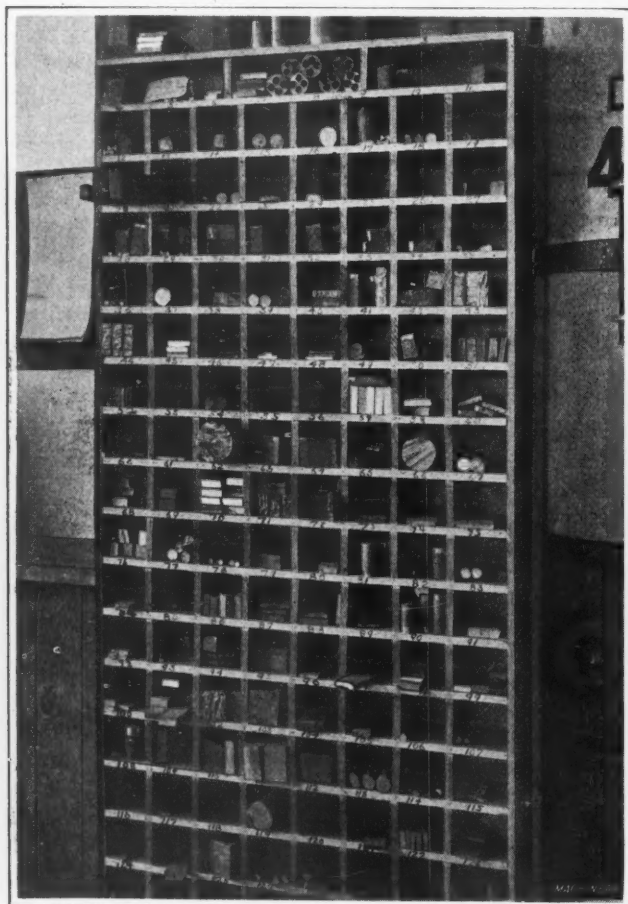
Fractured Bar Steel Samples which have been tested in the Metallurgical Laboratory
